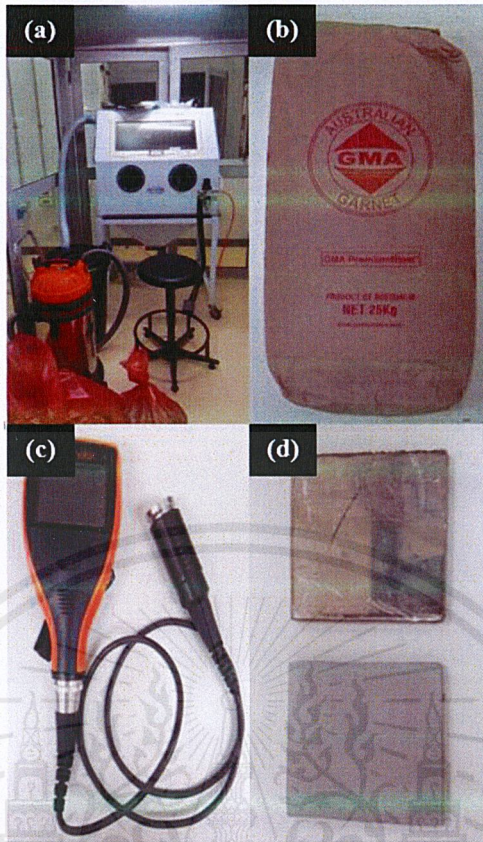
The equipment and samples for blasting (a) Blasting equipment set (b) Garnet (c) Surface roughness tester and (d) Samples before-after blasting.
